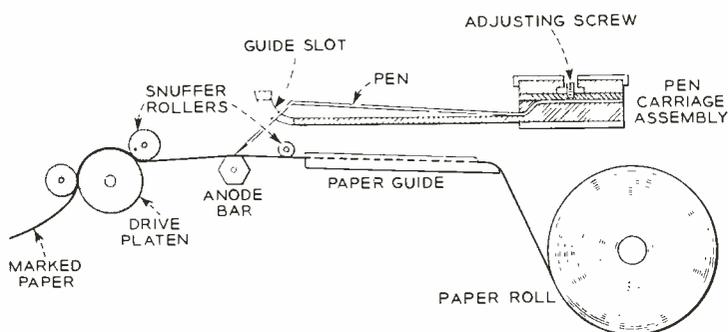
Details of the pen-carriage assembly and the paper drive arrangements.
